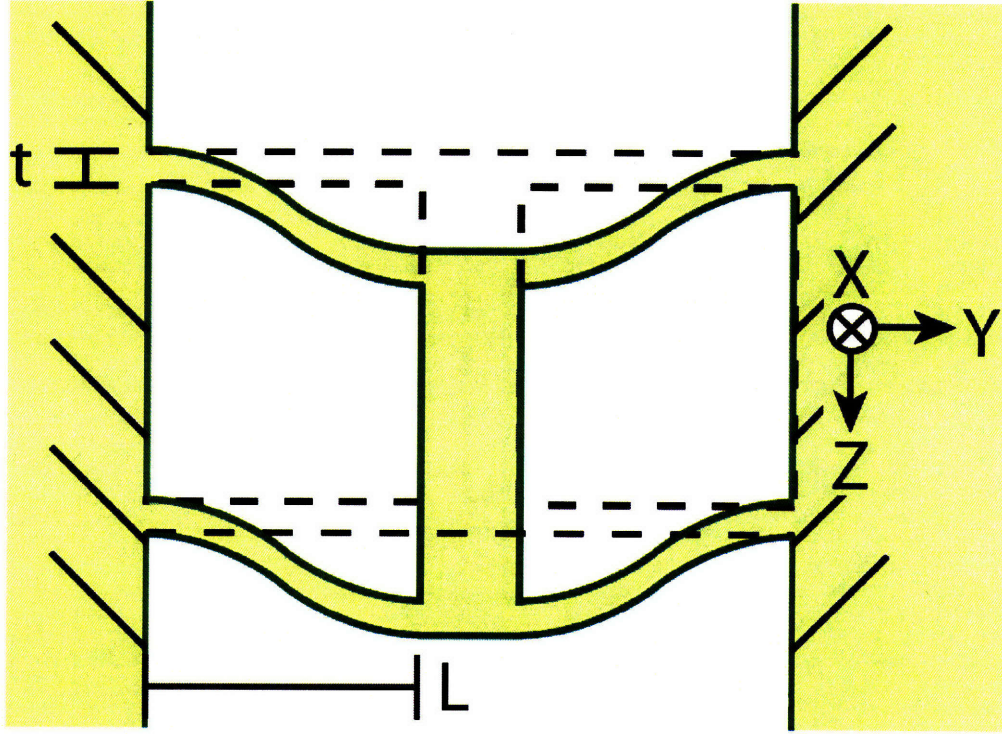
Cross-Sectional Sketch of the Single Beam Flexure
